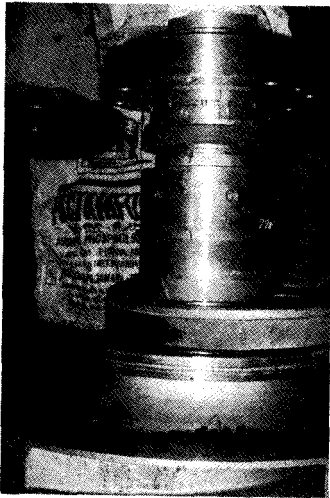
Failed, motor driven pump of a fertilizer plant.
